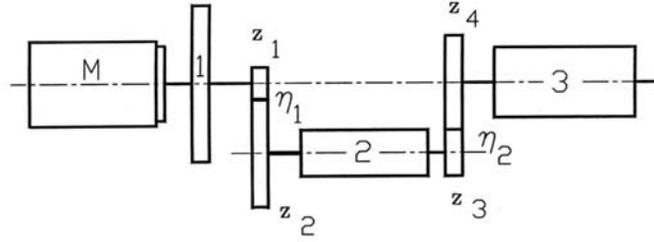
Electric motor driven rolling mill. *Numerical example 1.1.
